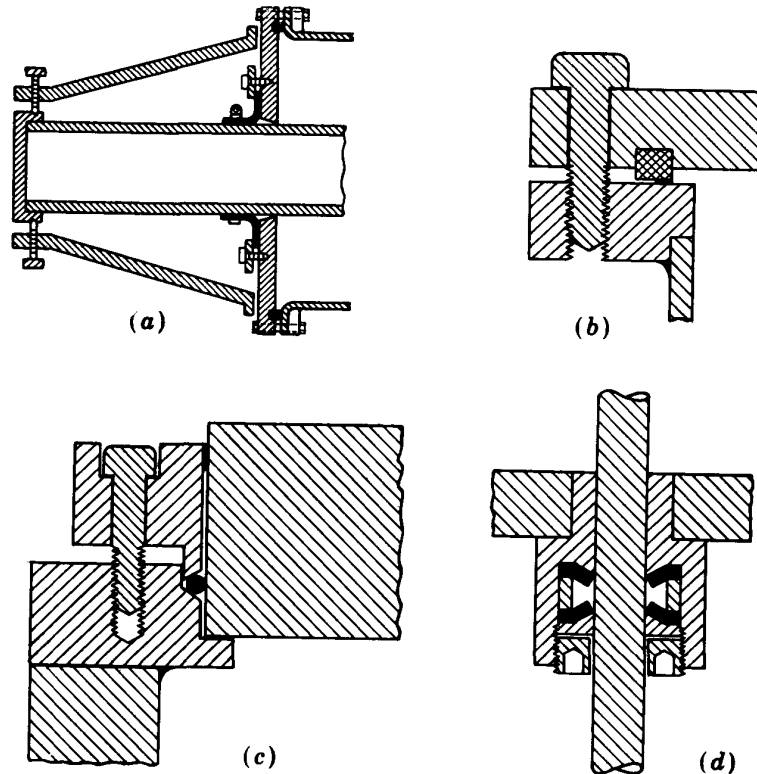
Gasket vacuum seals for several purposes: (a) D-stem flexible joint and D-line ring-gasket seal; (b) detail of ring-gasket seal; (c) chamber lid seal using O-Ring and packing gland; (d) shaft seal allowing lateral and rotary motion.
